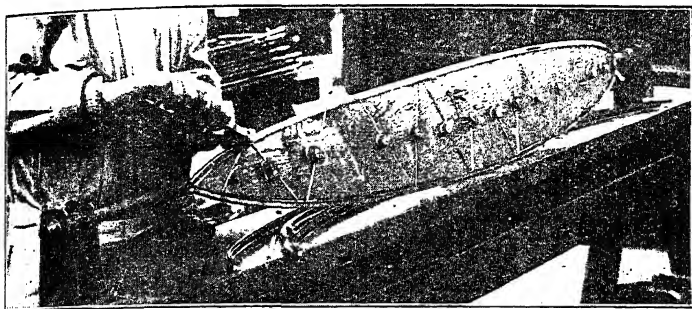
ARMSTRONG-WHITWORTH RIB ASSEMBLY JIG
